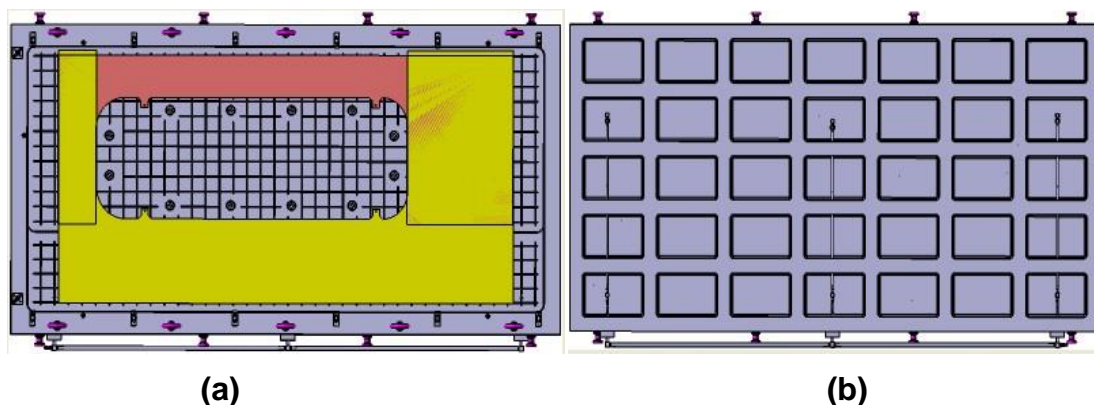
A vacuum milling fixture for aircraft skin manufacturing
